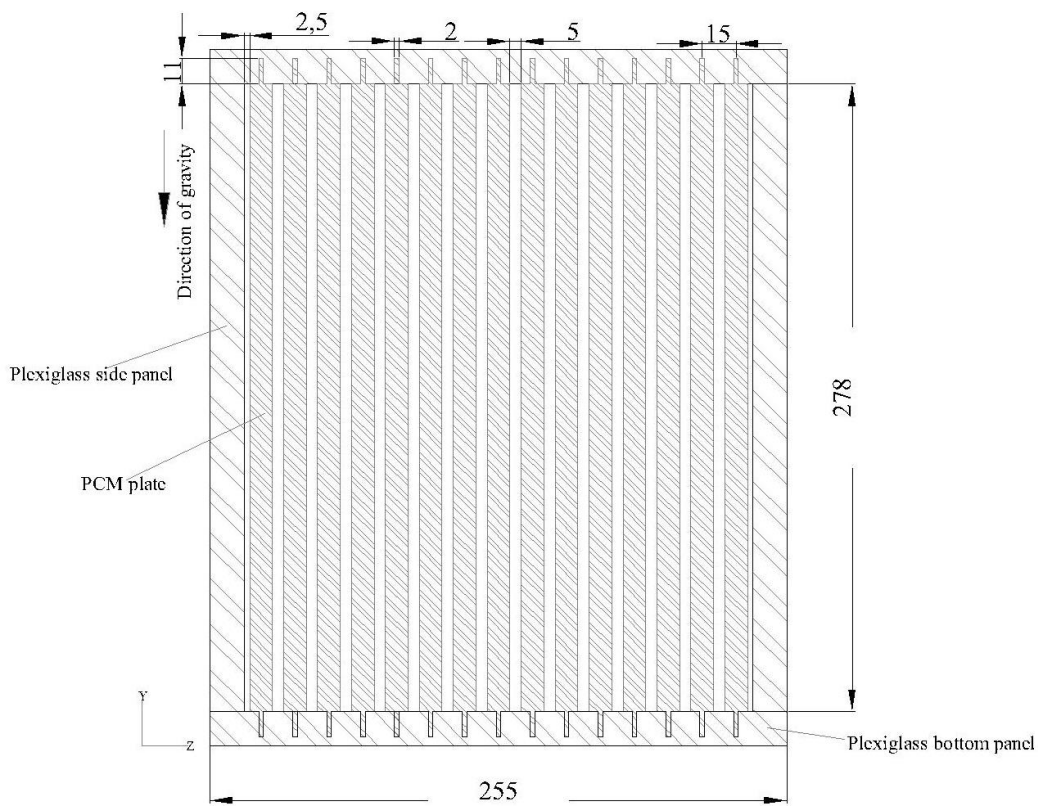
Cross-section for test section module (all dimensions are in mm).
